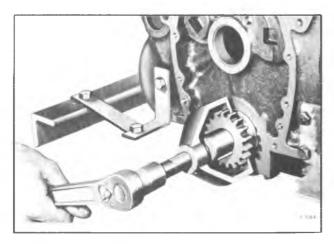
Removing Chain Sprocket from Crankshaft with Special Tool (Typical)
